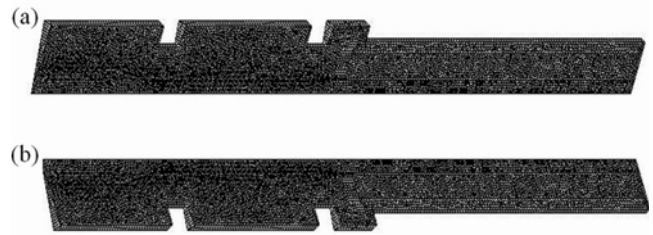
Two-dimensional model of mold and alloy: (a) upper surface and (b) lower surface.
